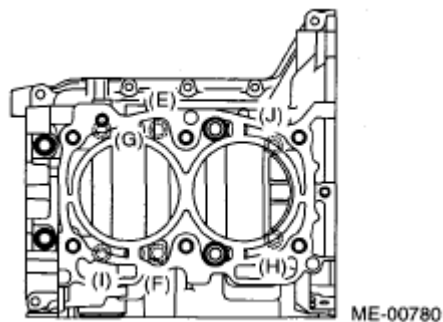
Identifying Cylinder Block Connecting Bolts Tightening Sequence (RH Side)
